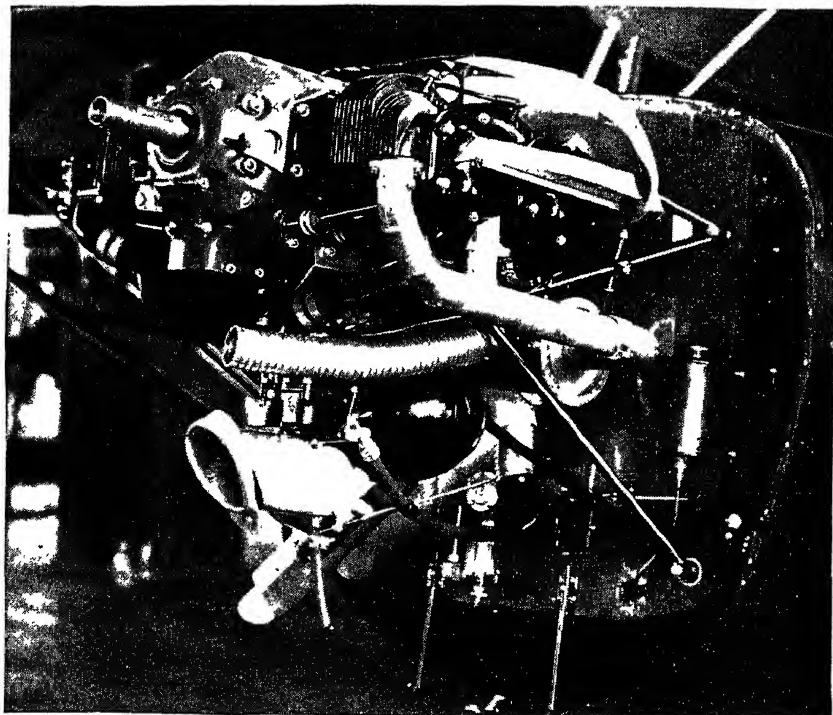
Light-plane engine installation. (*Piper Aircraft Corp.*)
